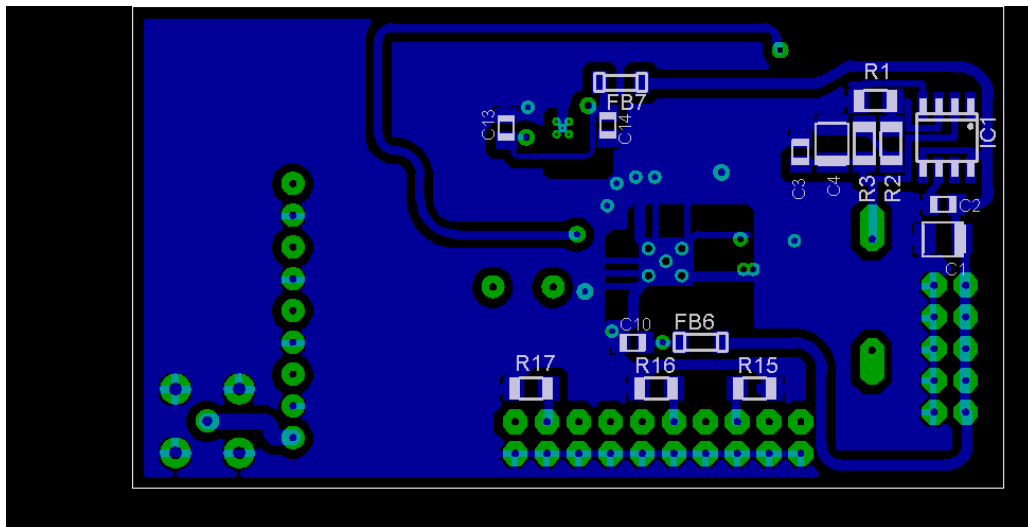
EVAL – BOTTOM Layer – As view on bottom side
